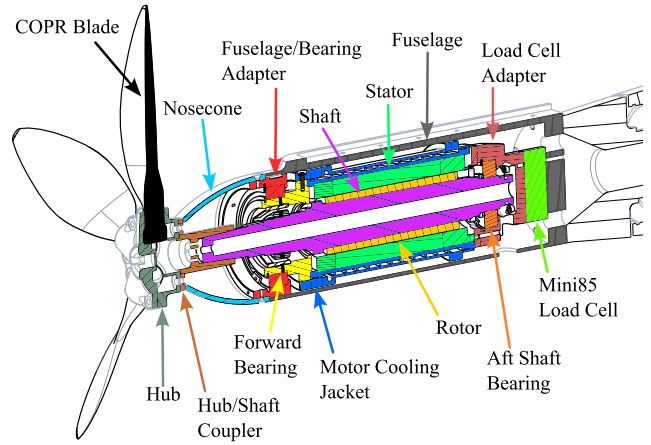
Cut-away view illustrating the primary components of the PTS motor assembly.
